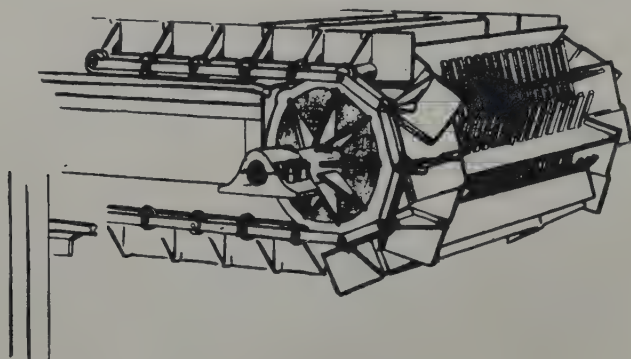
Rough sketch of traveling grate type of sintering machine illustrating heavy construction of parts.
